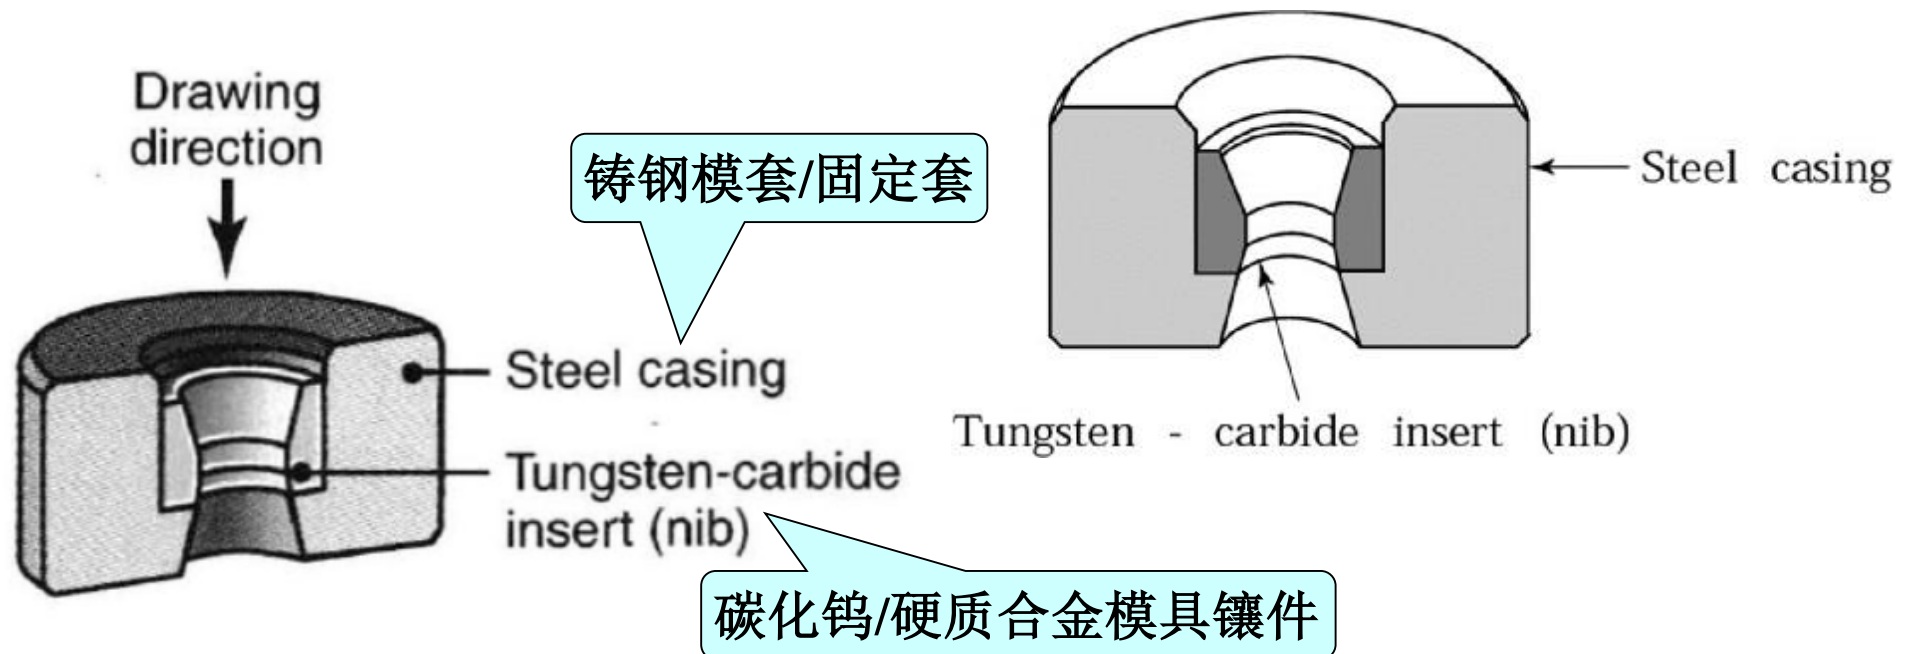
Tungsten-carbide die insert in a steel casing. Diamond dies used in drawing thin wire are encased in a similar manner.
